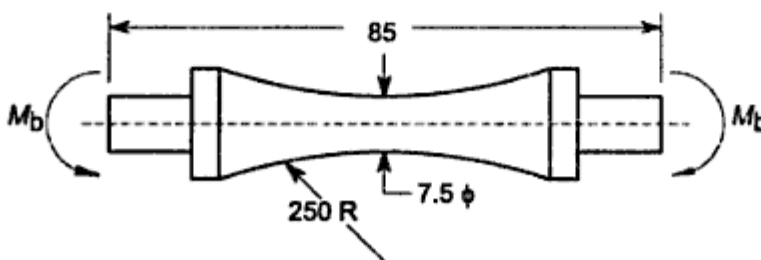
Specimen in Rotating Beam Fatigue Test
